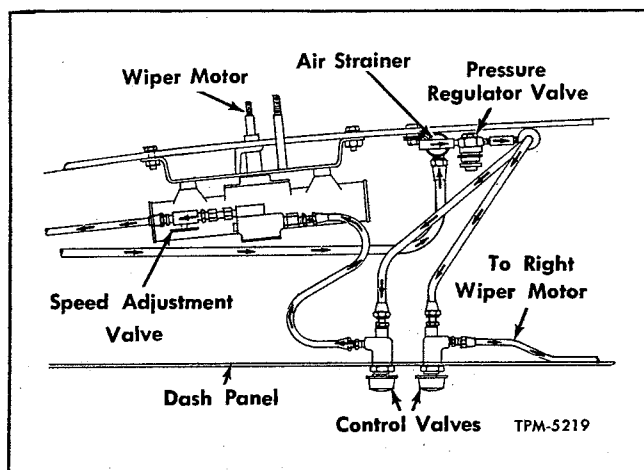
Windshield Wiper Maximum Speed Adjustment Valve Location (Sprague Type Wipers)
